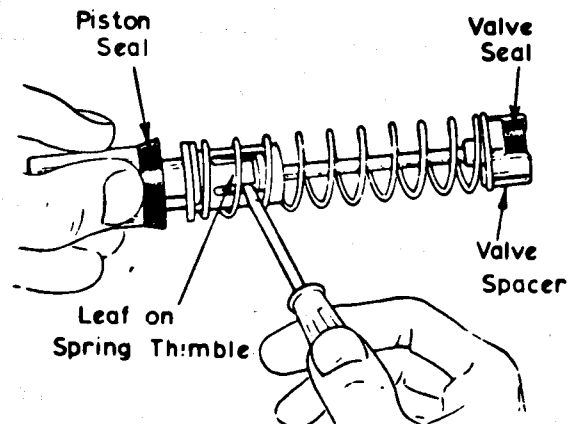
Dismantling the Master Cylinder Piston Assembly.
